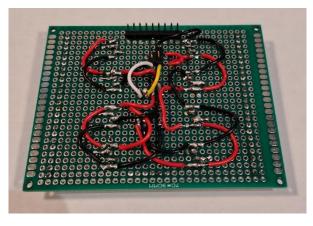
Mk.3 Upper prototype PCB wiring (Underside)
